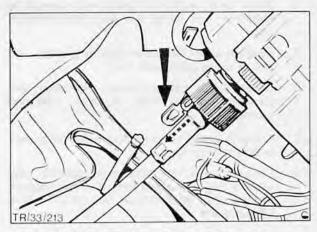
Release drive cable securing collar locking key (Key shown in 'out' position)
